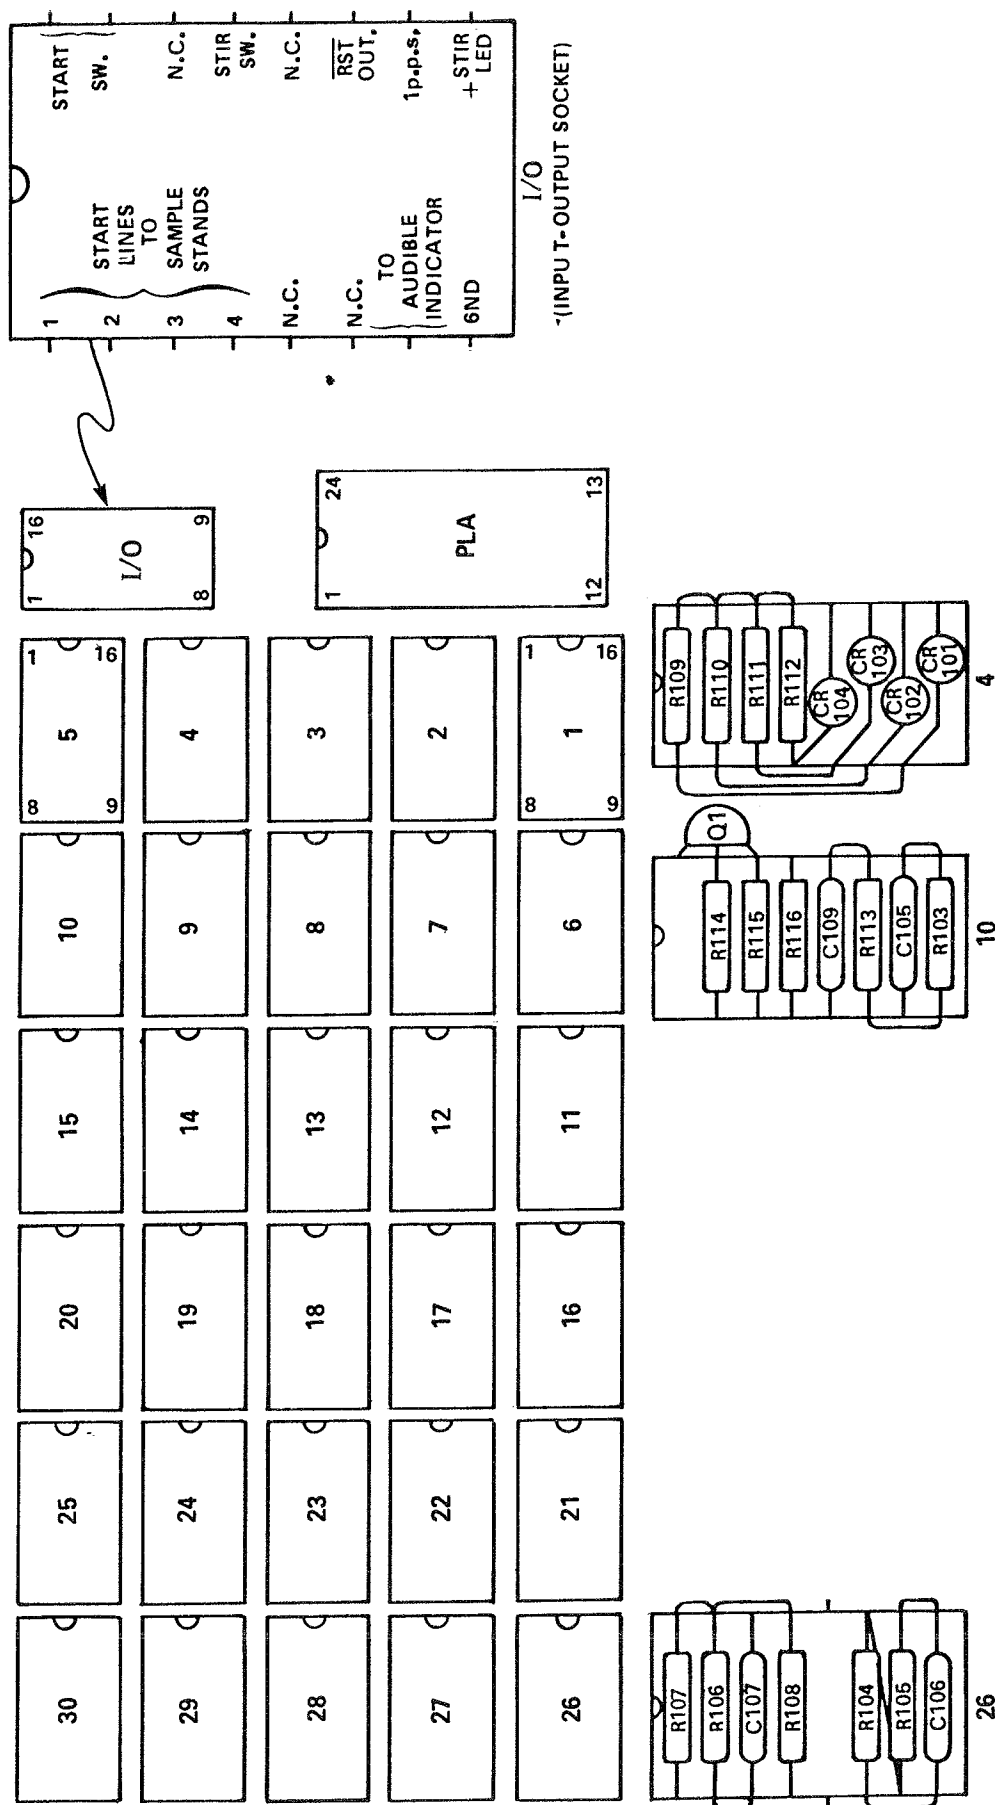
Parts location diagram for the control console integrated-circuit board. The input-output (L/O) socket and three component carriers (for positions 4, 10, and 26) are shown enlarged. All sockets have 16 pins except for the 24-pin PLA socket. The board contains a mixture of 14 and 16-pin integrated circuits, not counting the PLA. The 14-pin ICs are inserted so that their ground pin (7) matches the grounded receptacle pin (8) of the board. Ground and power pins are different for IC 29 and the PLA. Fig. 11 gives pin numbers for these ICs.
